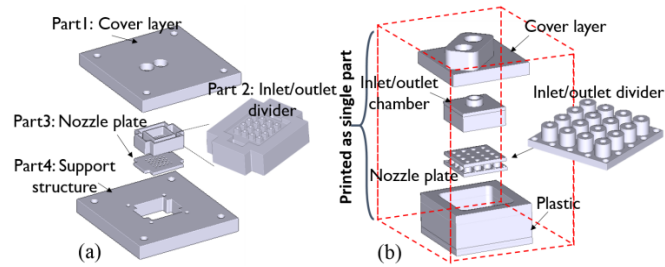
Internal CAD structures comparison between (a) mechanical MM cooler [6] and (b) 3-D printed cooler.
